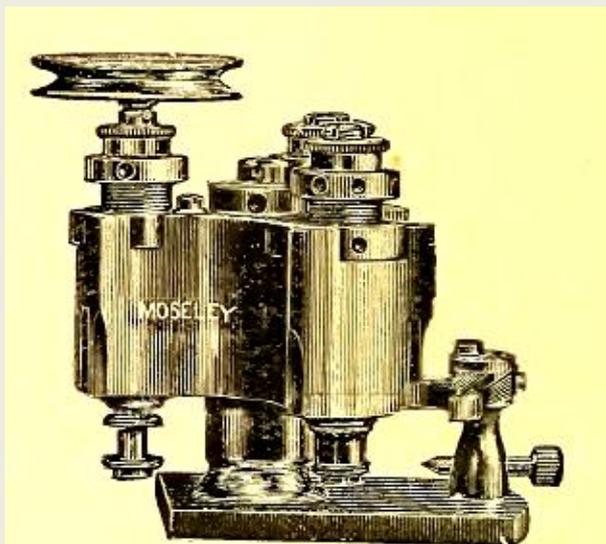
Moseley 3-Spindle Wheel Cutter to bolt on slide rest; also made with one spindle; the pump center shown at the rear is used to align the cutters with each other and with the lathe center.
